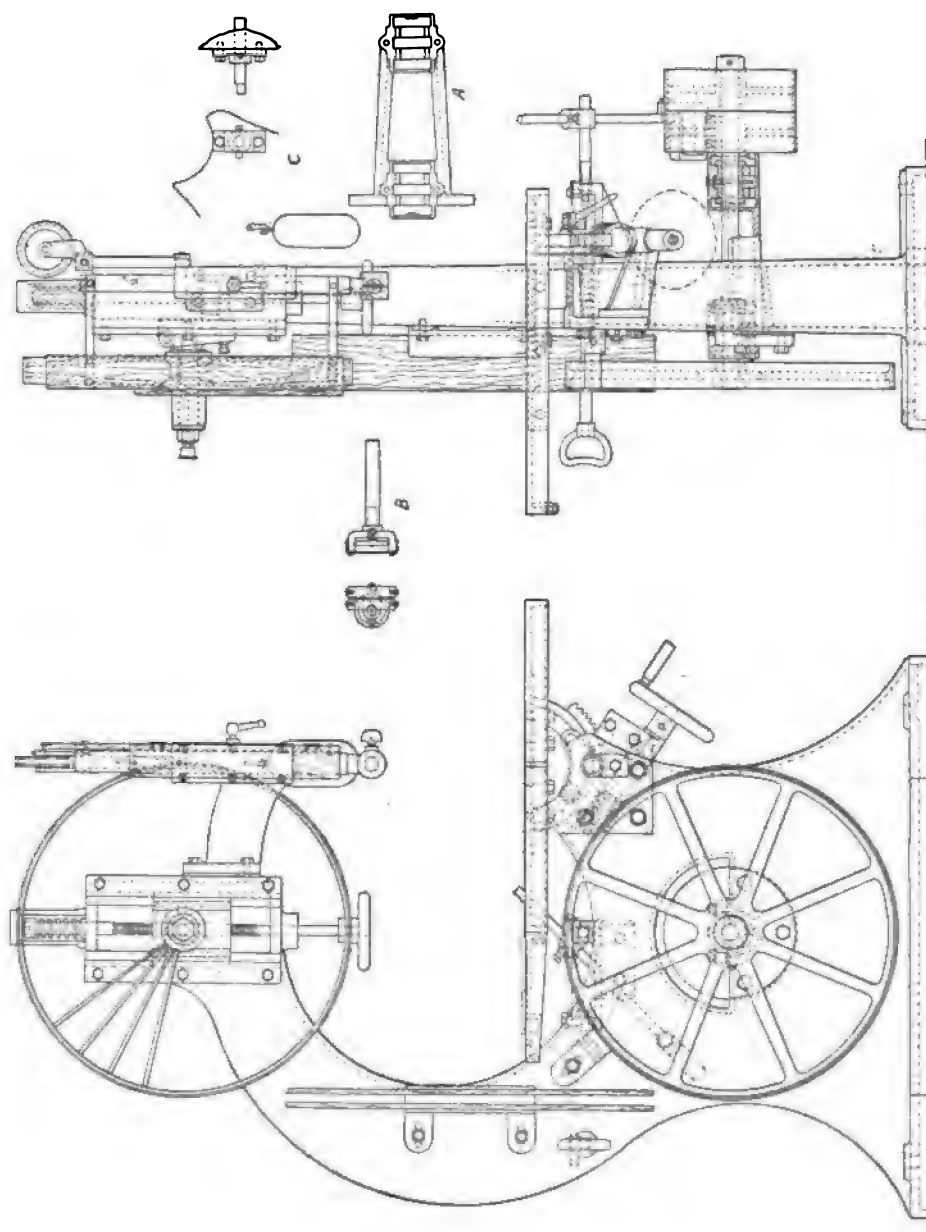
30-inch Band Sawing Machine. (J. Sagar & Co., Ltd.)
